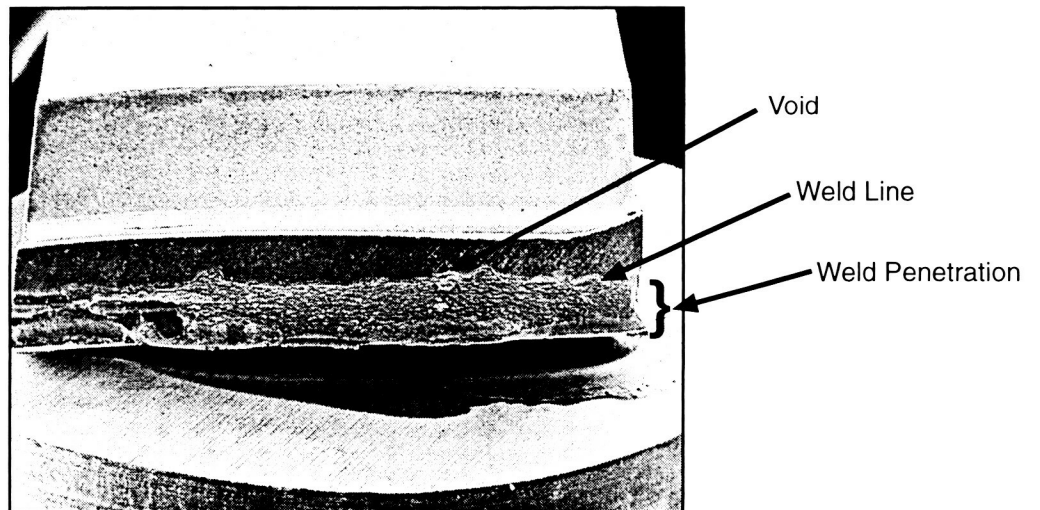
Weld Zone With Prominent Void (12X)
